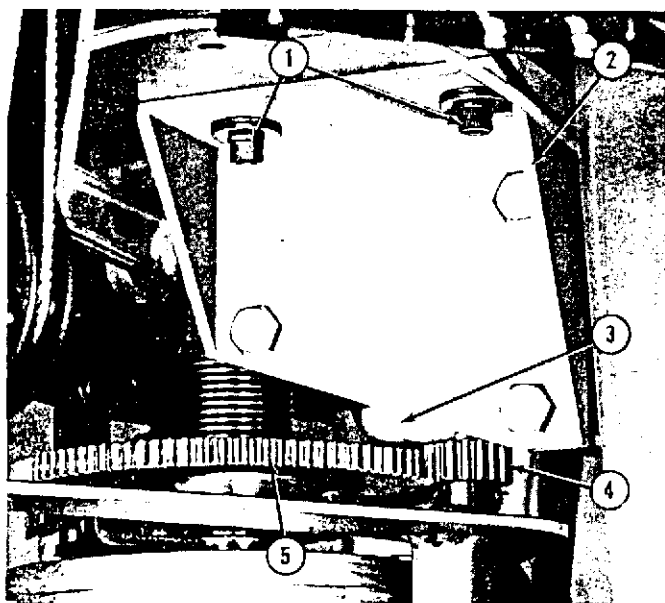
MAIN SHAFT DRIVE GEAR AND PINION
